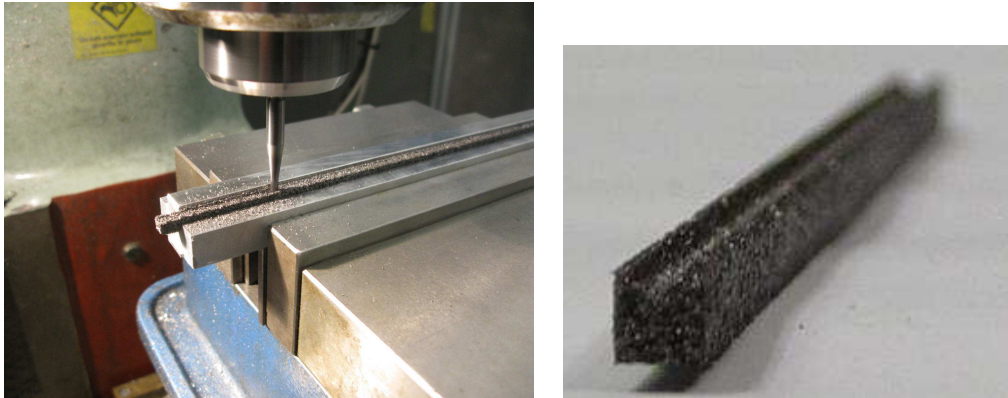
Machining of the POCO foam (left) and the resulting piece (right). The modelling of the base material piece goes first with a roughing down using a handsaw and then with a milling process. A custom-made milling cutter of circular cut is needed to mechanize the internal radius of contact with the pipes.
